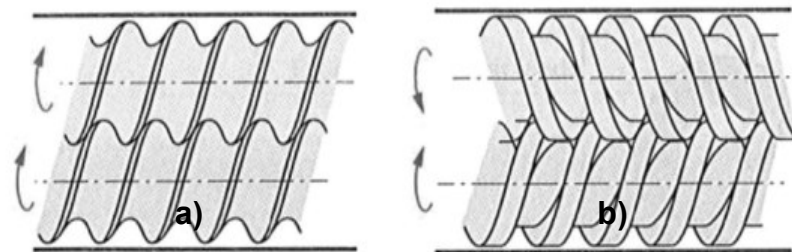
a) Co-rotating & b) Counter-rotating Screw System [52].
